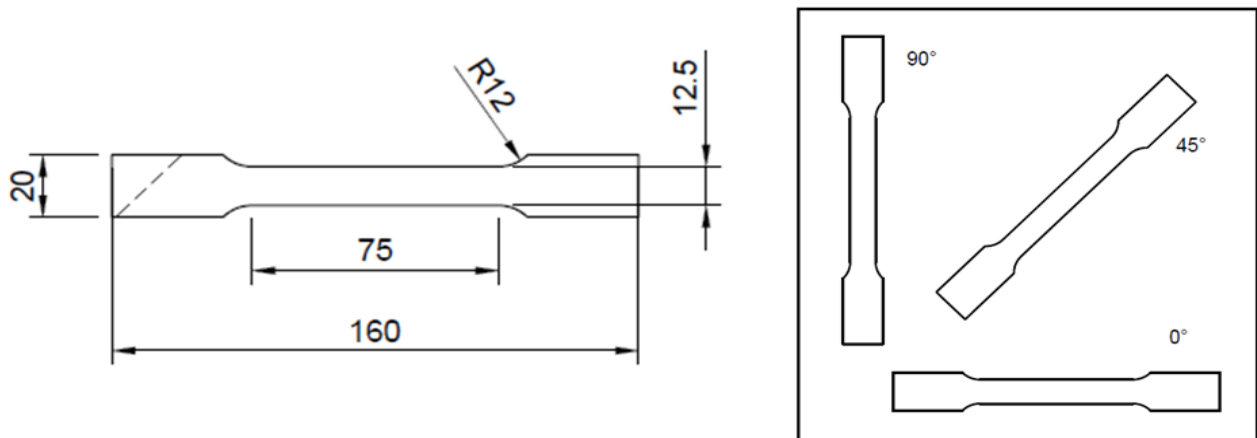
Tensile test specimen dimensions (mm) taken at different rolling directions.
